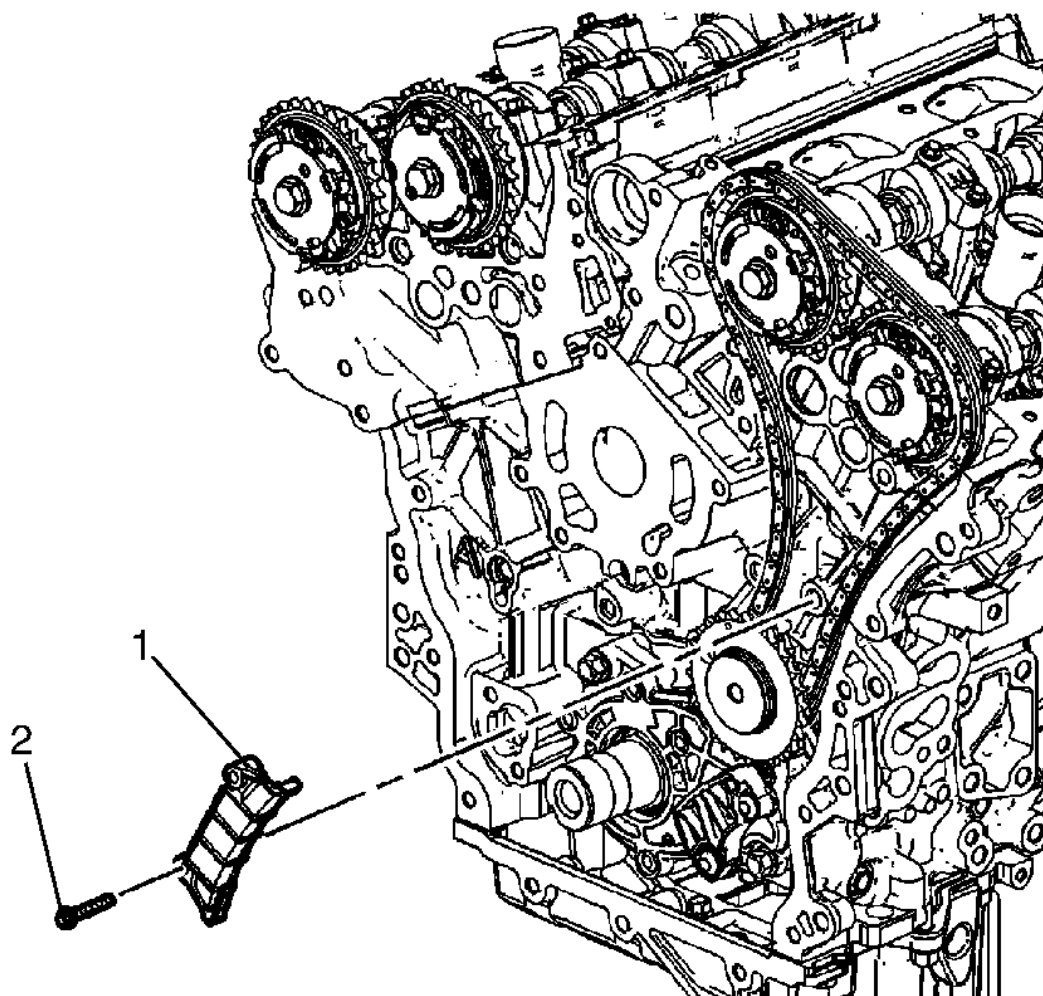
View Of Left Secondary Camshaft Drive Chain Shoe
